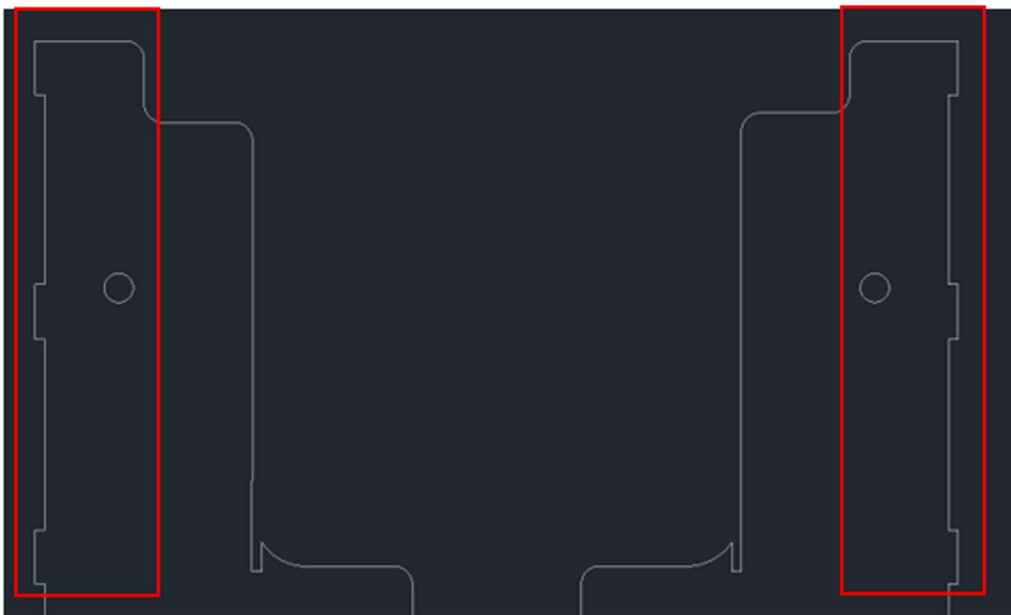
Base plate interlocking stepped joint detail, with mating edge regions highlighted in red.
